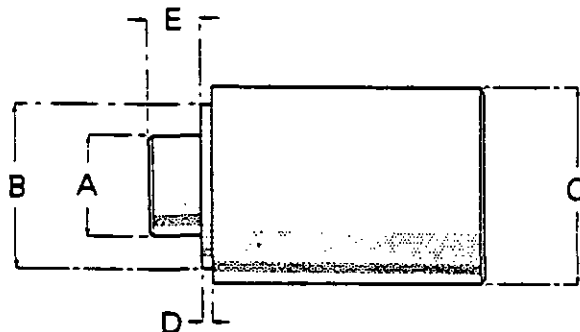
TOOL FOR FITTING DRIVING GEAR OIL SEAL (TWELVE-SPEED)
